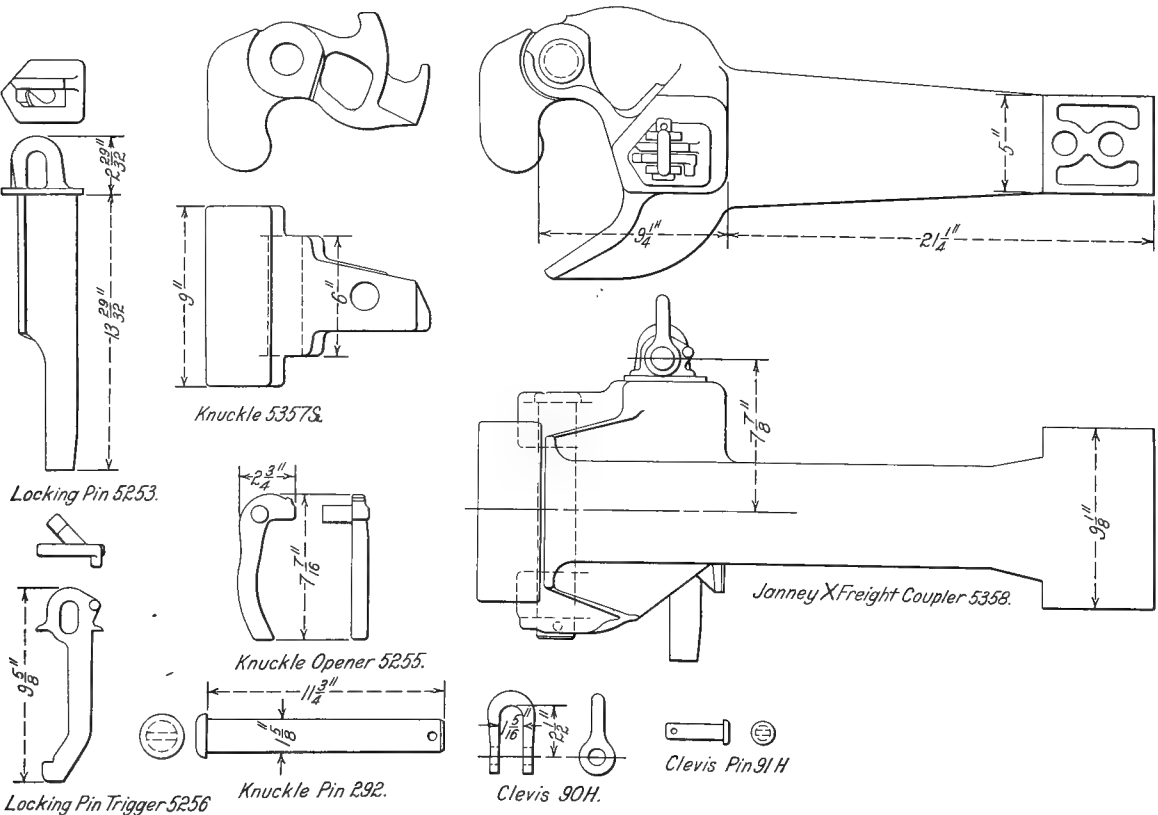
Janney X Freight Coupler and Parts. McConway & Torley Company.
